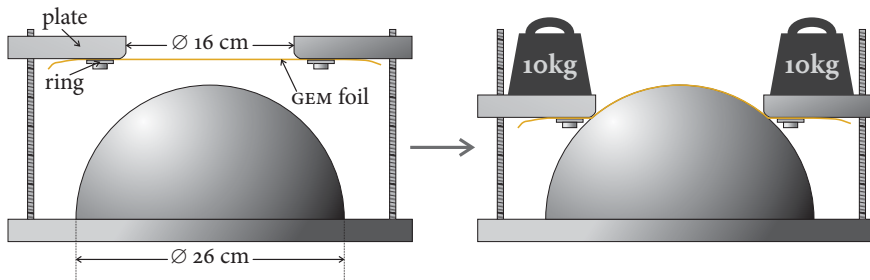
The setup built to spherically form a flat GEM. The setup is placed in a vacuum vessel inside an oven. All parts are stainless steel.
